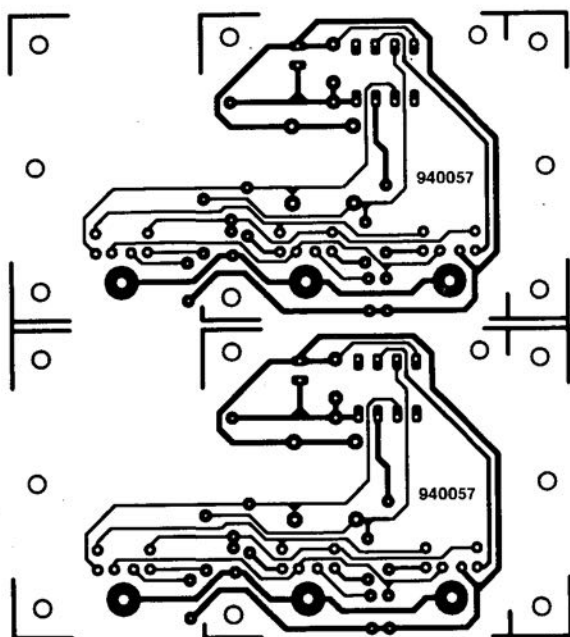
Track layout and component overlay of the printed circuit board designed for the bus booster (two on one PCB).
